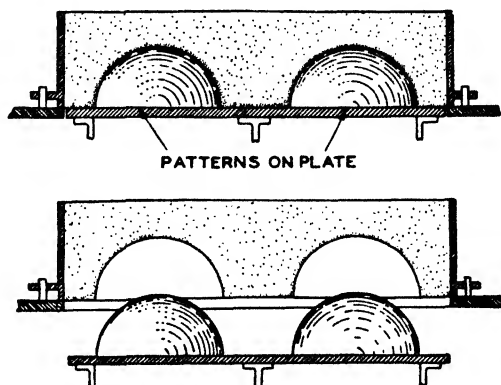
PRINCIPLE OF DRAWING PATTERN ON PLAIN STRIPPER MACHINE
